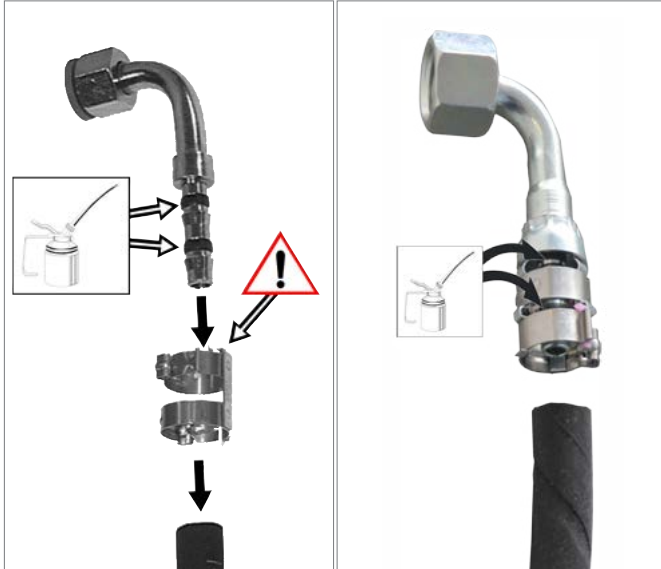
Fitting with separate clamp Fig. 43: Fitting with fixed clamp
